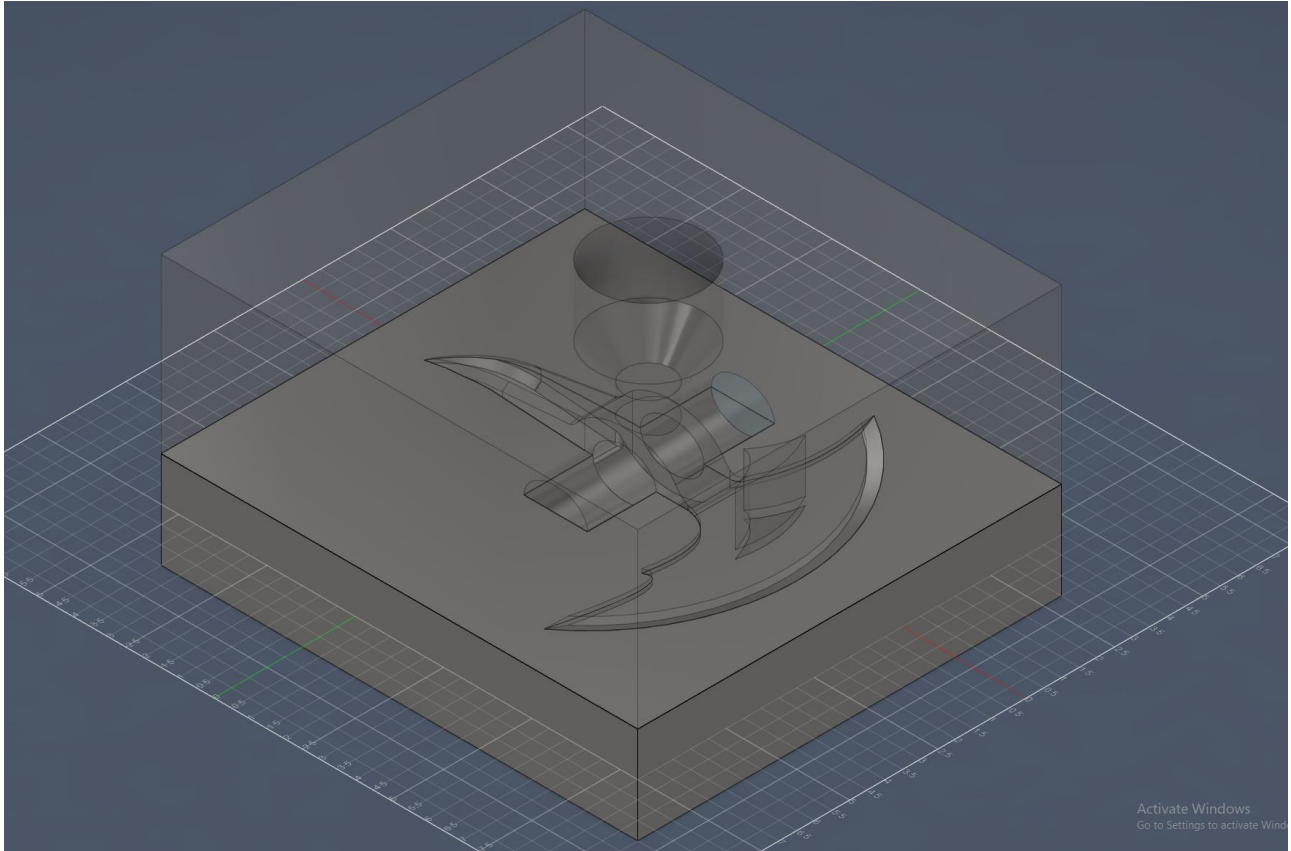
The 3d model of Tank's mold including space for two cores and a simple riser included in the sprue.
